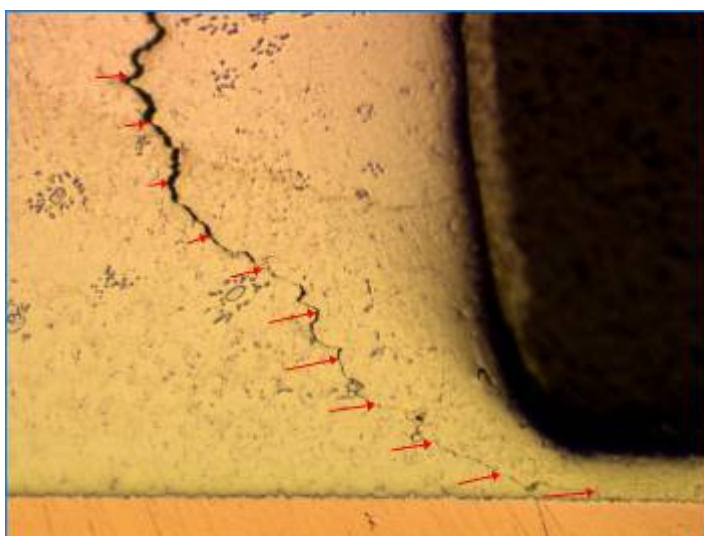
cross section, SN63, U52, left pad solder crack, 200xa
